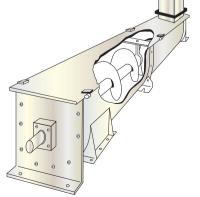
A U-shaped, trough-type screw conveyor requires support bearings, but allows for longer conveying distances and lower fill levels
